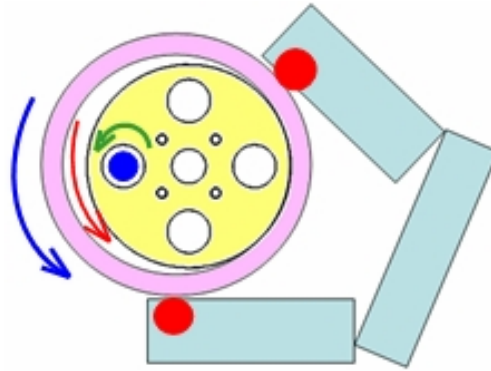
Schematic for the rotation mechanism of work ring, workpiece fixture, and work cylinders.
